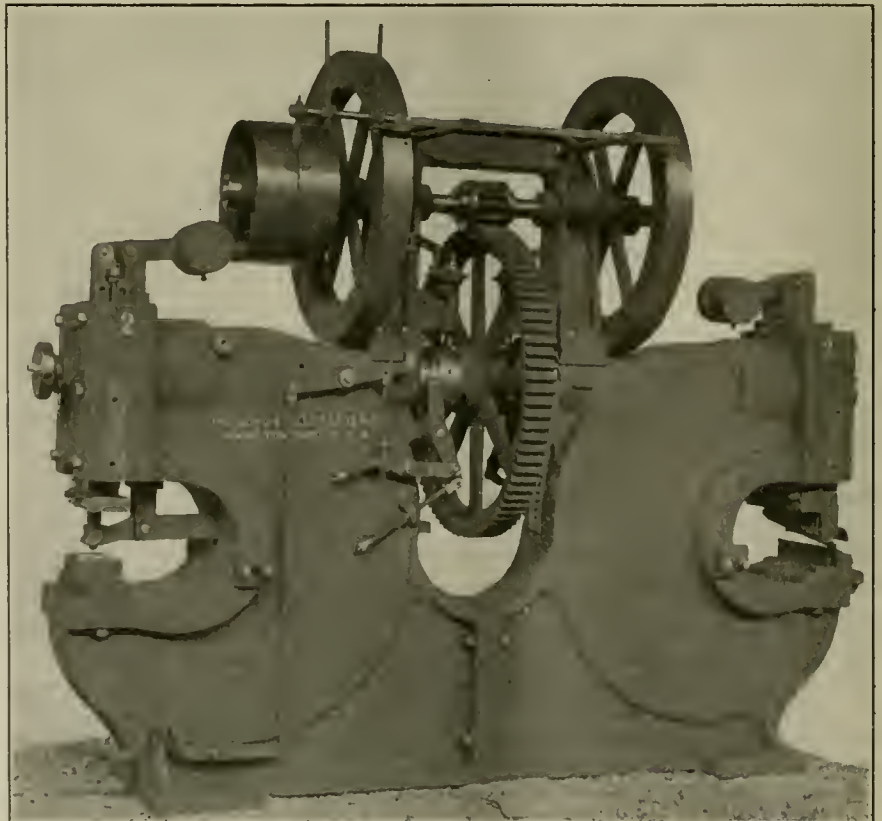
DOUBLE TYPE OF PUNCHING AND SHEARING MACHINE.
